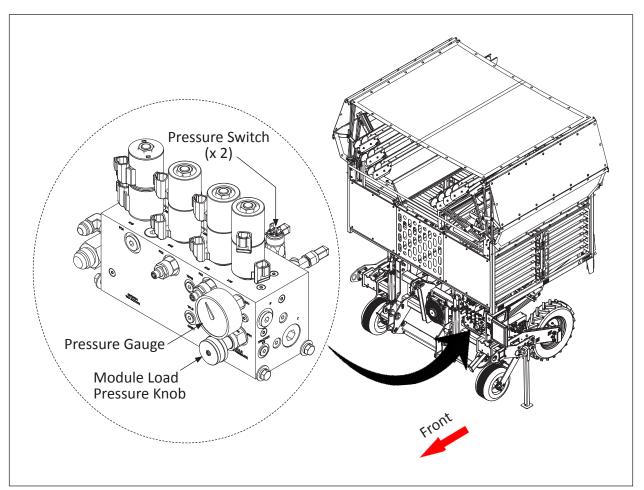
Enable/Disable Planter Moduls\_Pressure Switches
